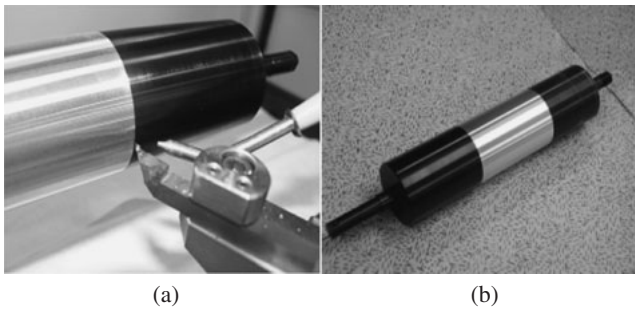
Images of (a) the tooling process using the two-axis CNC diamond machining system, NANOFORM[®] 200, and (b) a machined aluminum roll stamp of length 210 mm, diameter 50 mm, and patterned length 80 mm.
